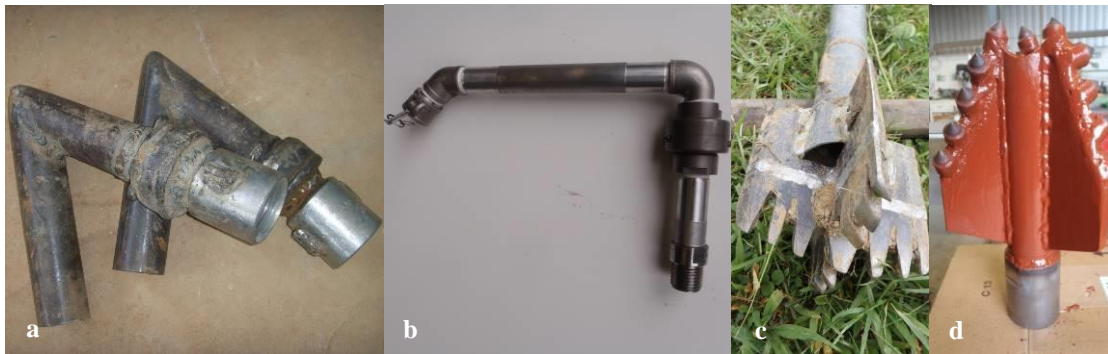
a) Drill pipes used in developmental context. b) Improved drill pipes.3
